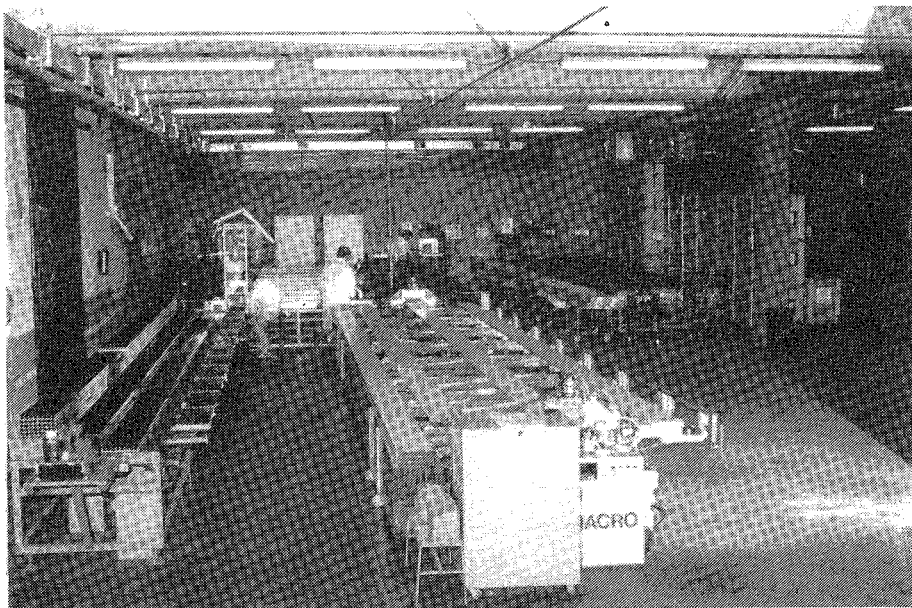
Assembling and testing facility for the MACRO streamer tube chambers^[23]. Most of the machines were built by the firm of ref. [21]. The machine to stretch the wires was built by the INFN-Bari collaborators of MACRO.
